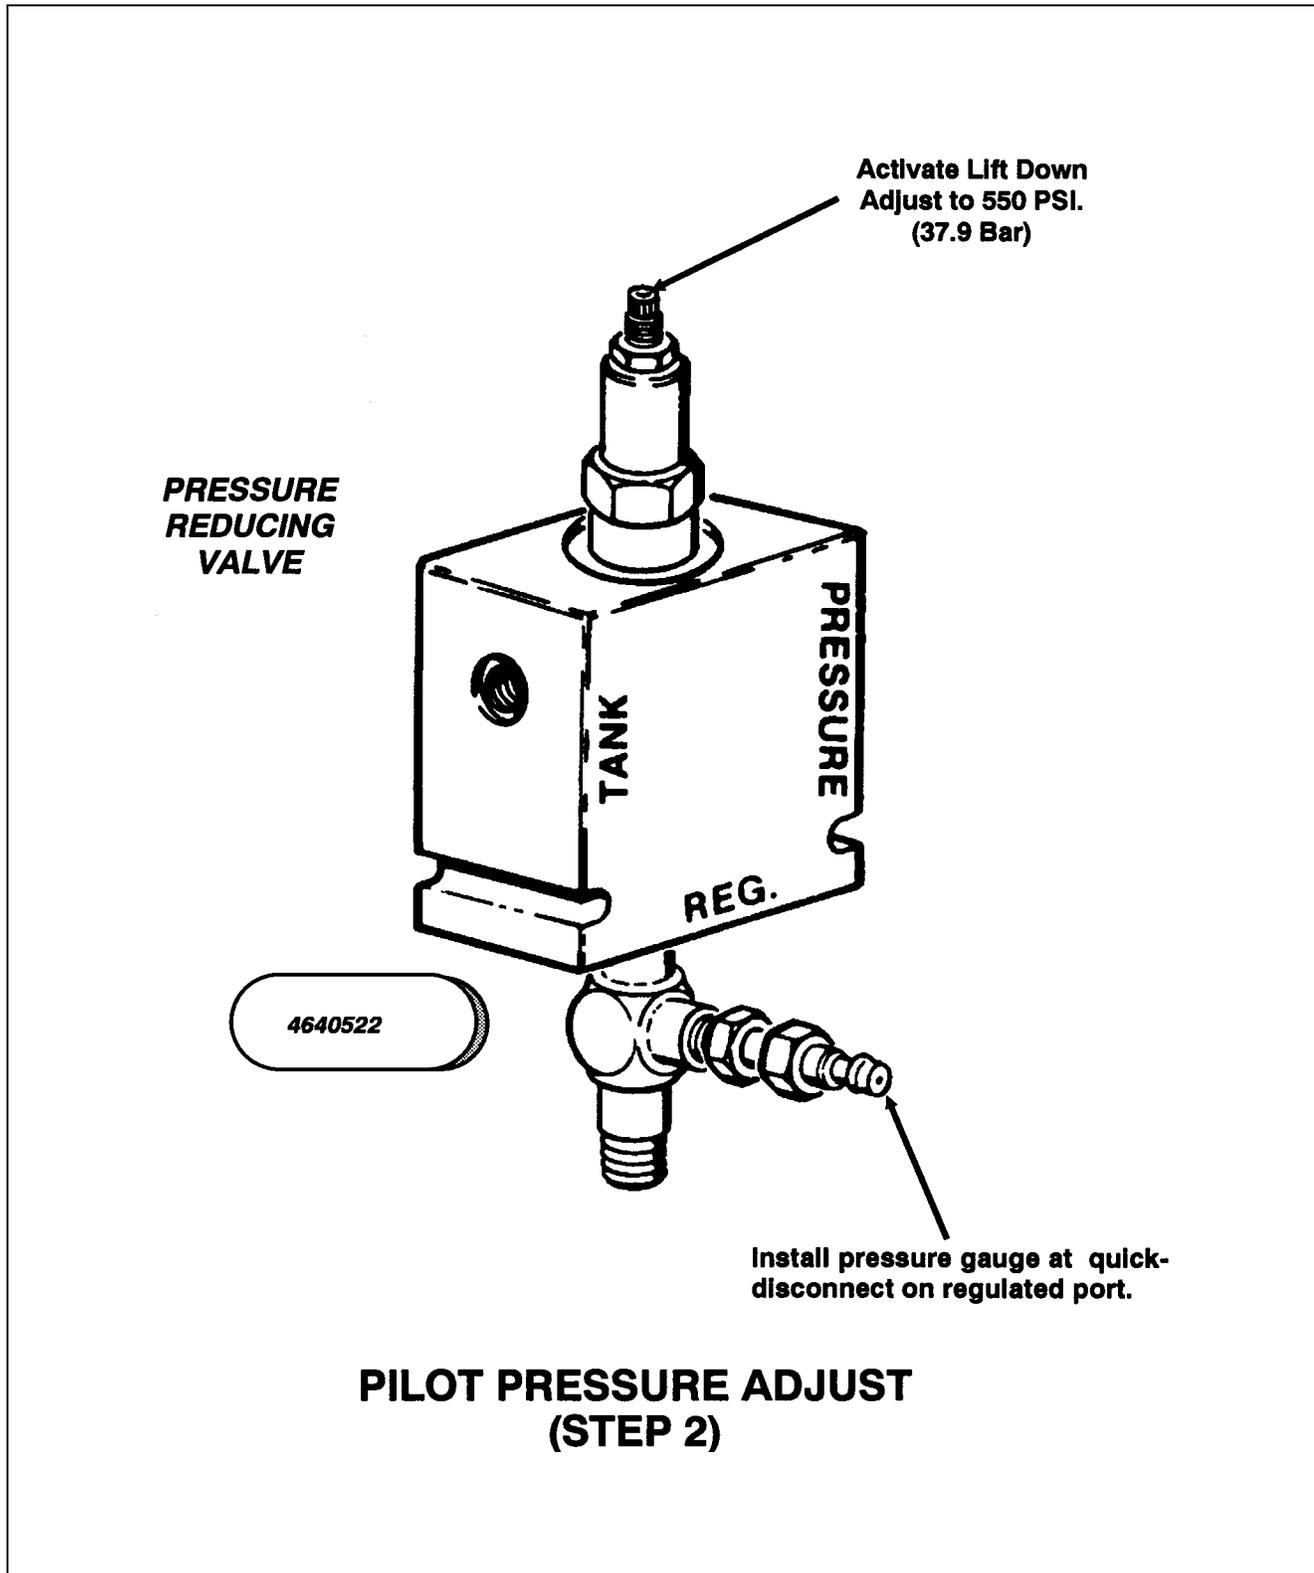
Vickers Proportional Valve Pressure Setting, Machines Built To Present. (Sheet 2 of 4)
